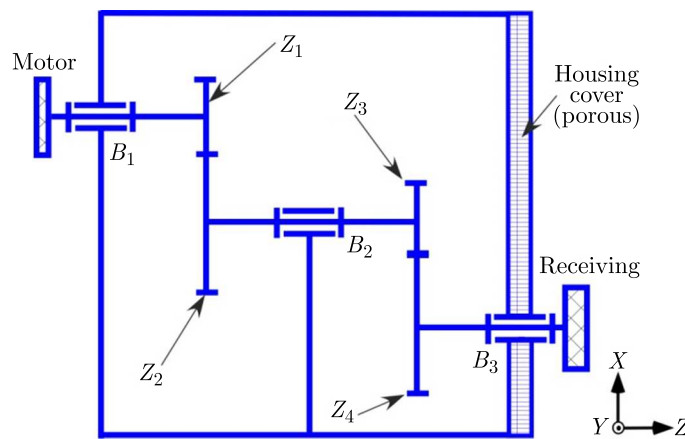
Plane configuration of a two-stage gear system and the porous housing cover
